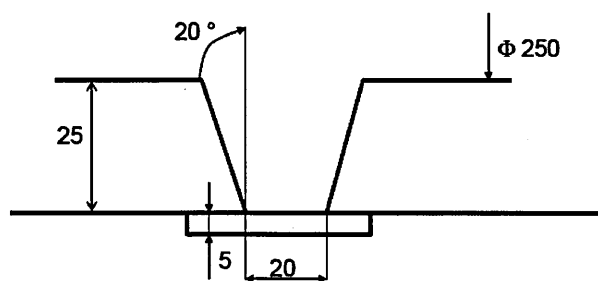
Weld groove preparation of STYLE pipes MU4-1 and MU4-3.
